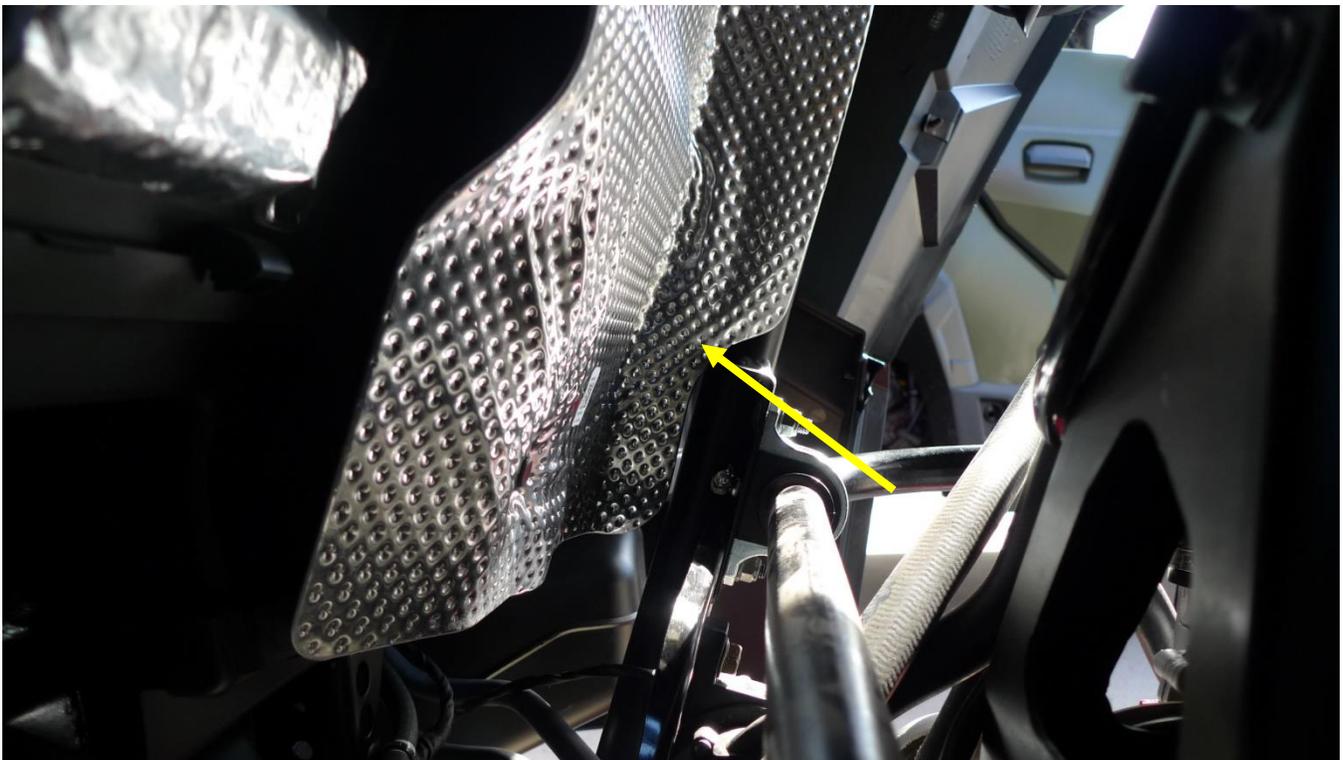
Firewall Heat Shield, to Remove (Turbo Only)
